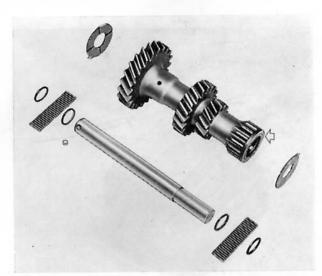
Layshaft gear, shaft and bearings on a threespeed transmission. Arrow indicates thrust ring, which is not renewable
